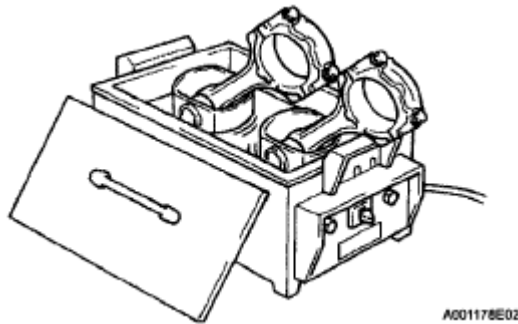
Identifying Piston With Connecting Rod Gradually Heat
